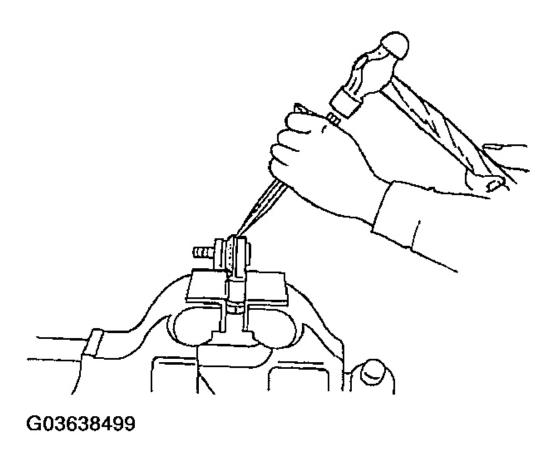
Removing Boot By Tapping With A Hammer Courtesy of MAZDA MOTORS CORP.
